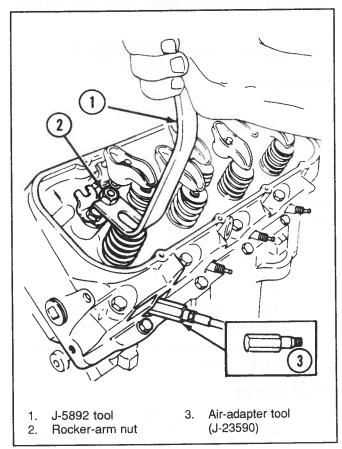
Compressing Valve Spring With Cylinder Head Installed
